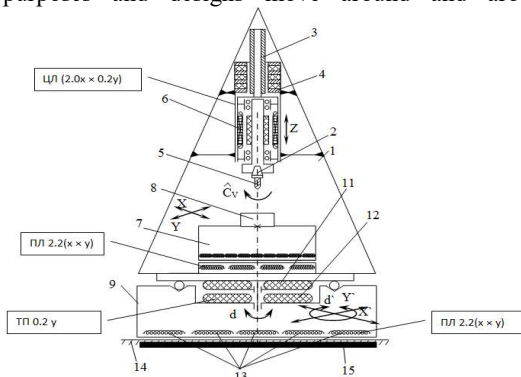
Multi-axis mobile drilling and milling machine of the future without mechanical gears according to the patent of Ukraine for invention No. 101447 with genetic formulas of nodes (mechanisms)
